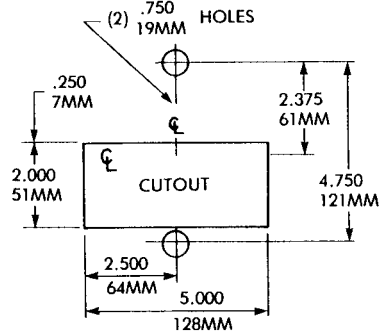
Panel drilling for surface mounting for Type C1 case relays on panels no larger than 0.188 in. (5mm) thick
